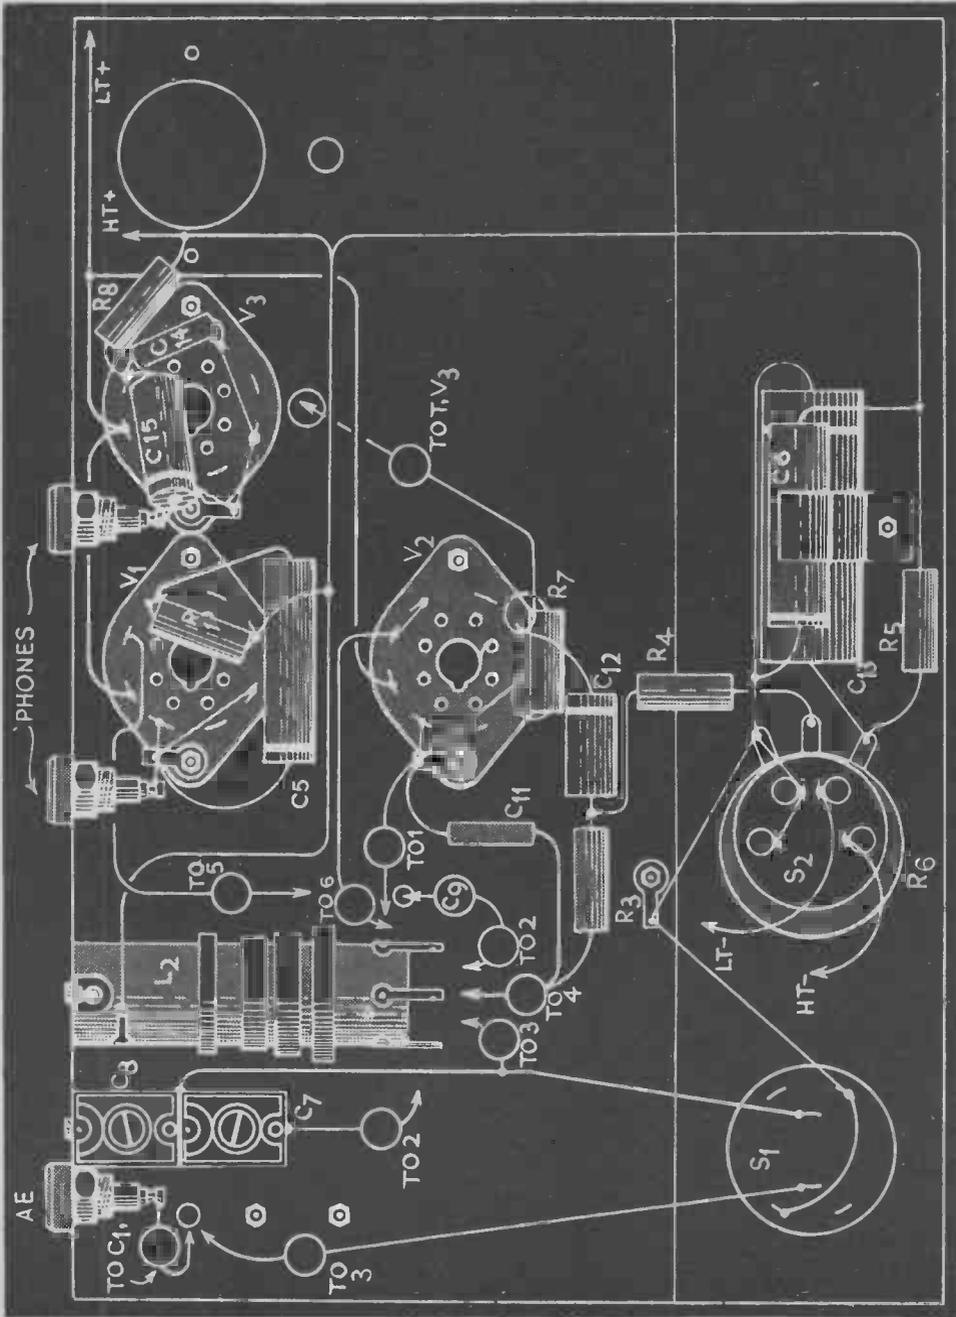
UNDER-CHASSIS VIEW OF THE THREE-VALVE RECEIVER
